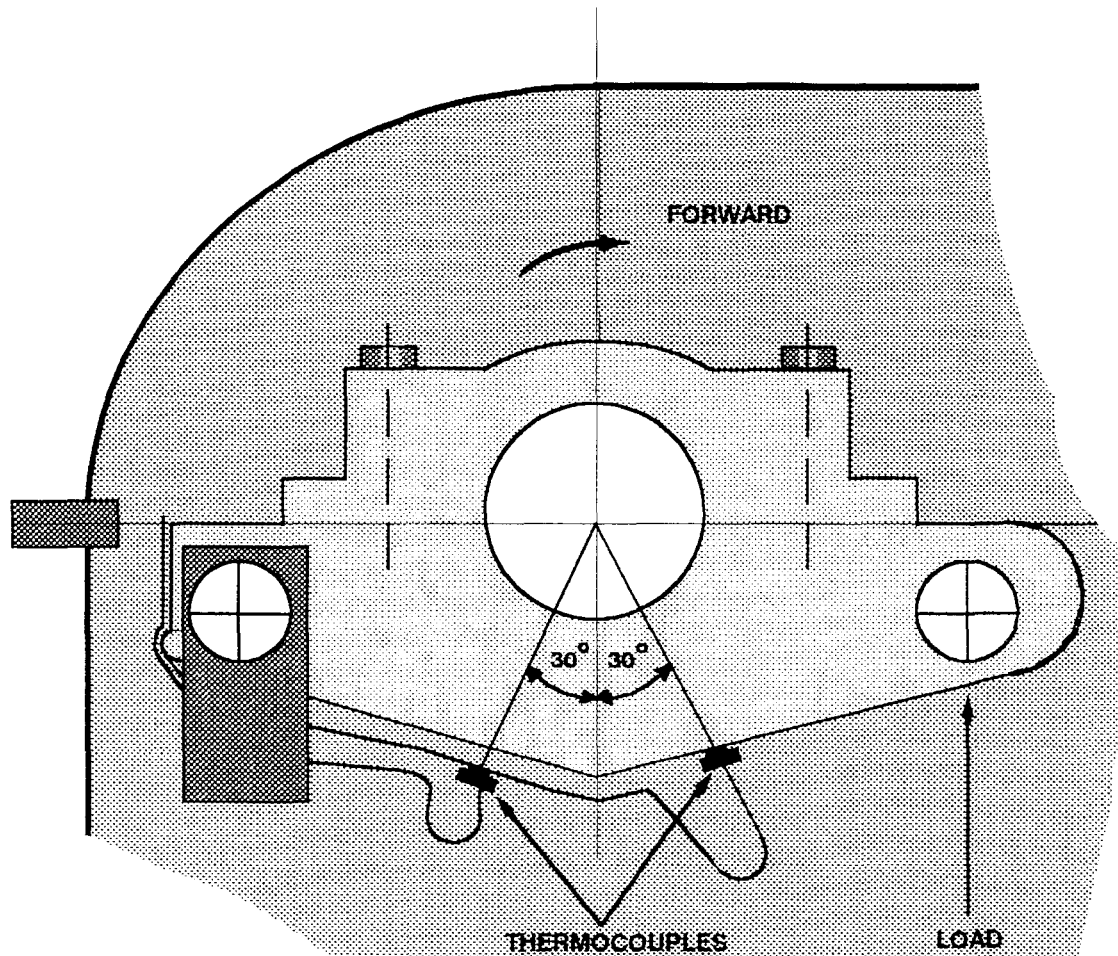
THE TEST BEARING THERMOCOUPLE LOCATIONS
